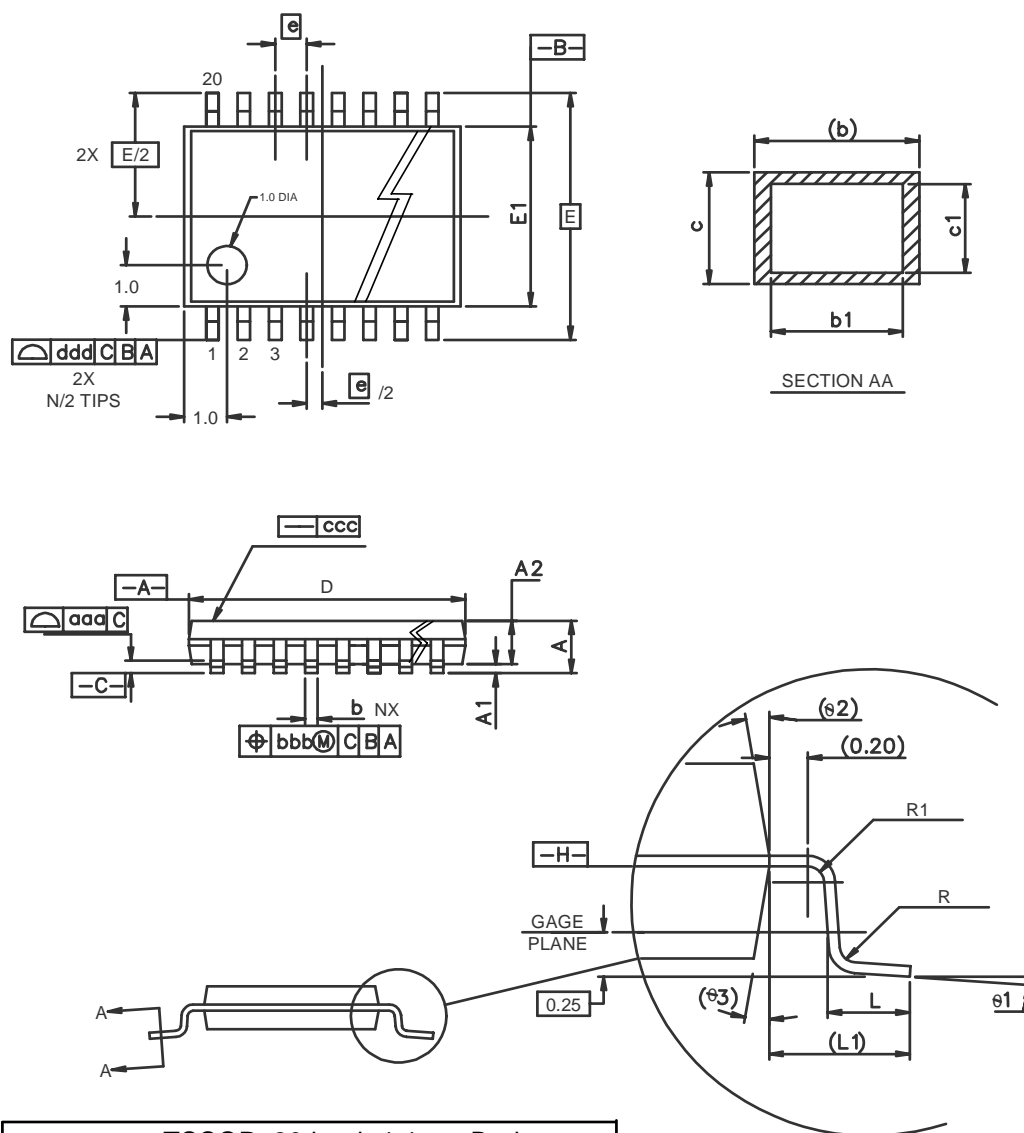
DEI 20 Lead TSSOP Package Dimensions
